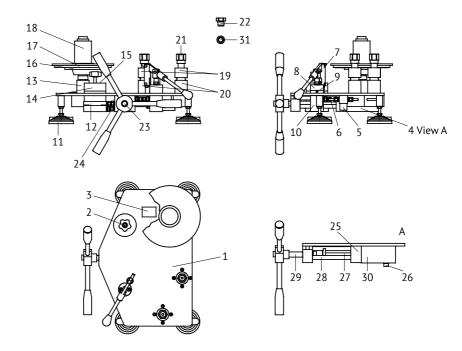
Deadweight tester MP-60, MP-100, MP-250, MP-400 and MP-600 in common version:
